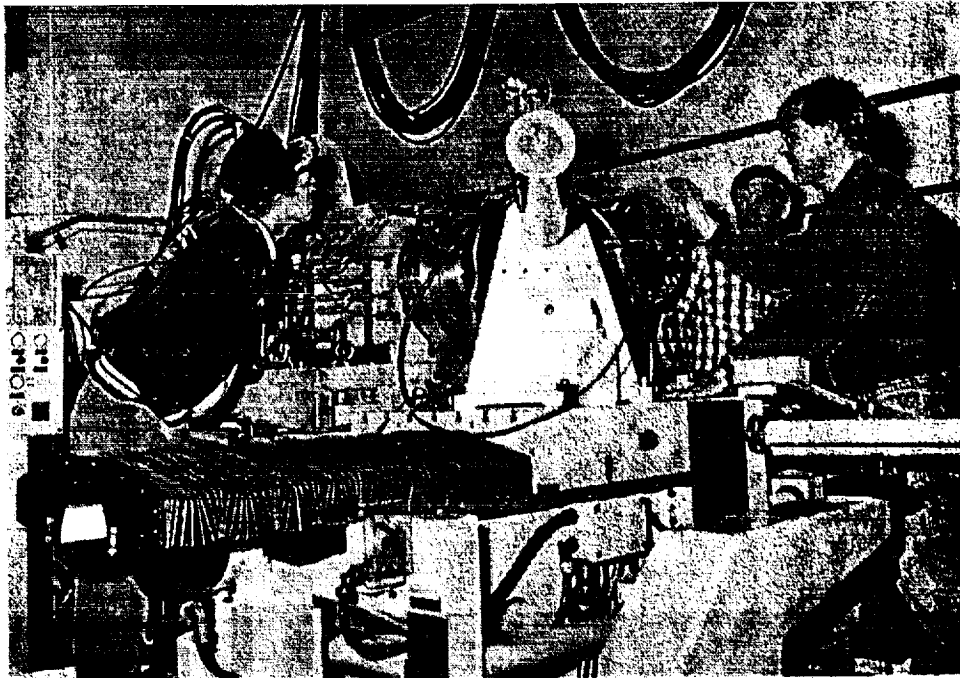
Moore M-40 aspheric generator. The mandrel used to fabricate the full-scale optic is shown attached to the machine spindle. The diamond tool is supported by the large casting in the center of the picture. The radial (X) slide is covered under the bellows in the left part of the picture and the laser interferometer feedback system for the axial (Z) direction is housed in the tube to the right.
